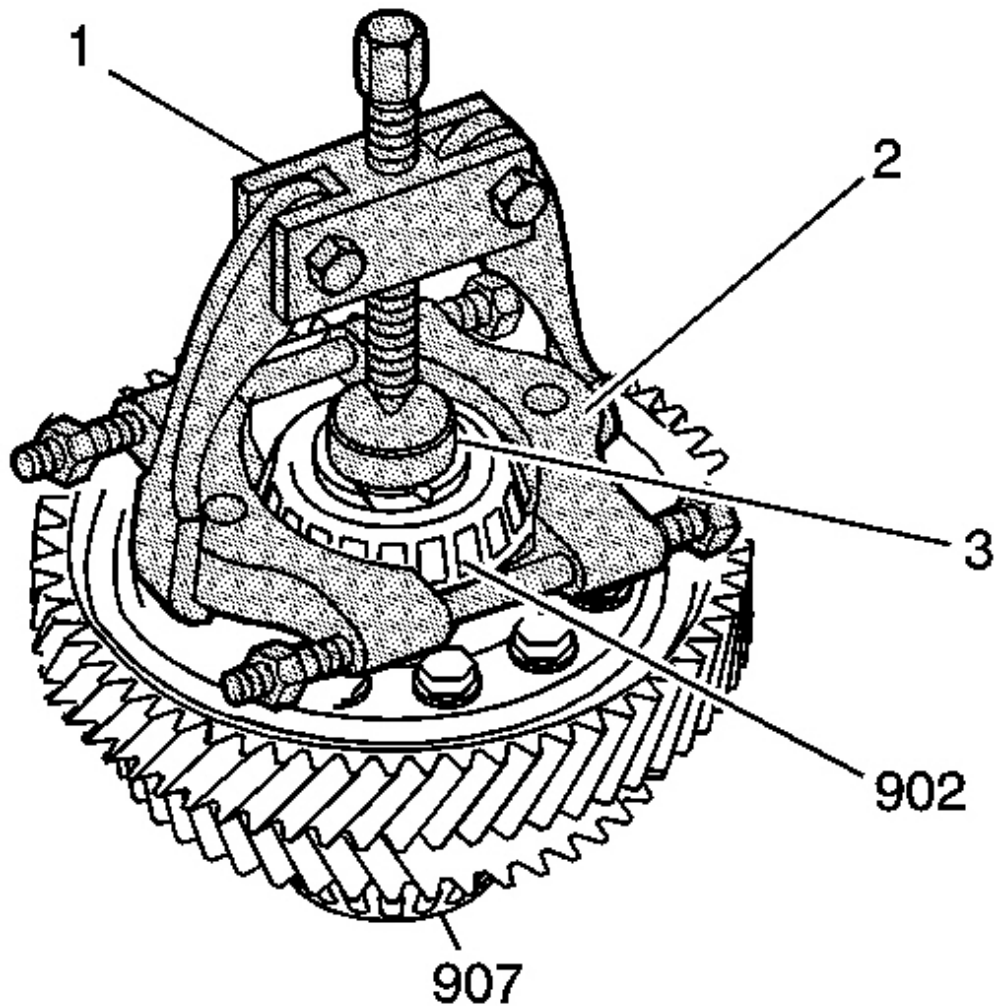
Removing Front Differential Tapered Front/Rear Roller Bearing Using SA9211T-2 & J 22912-01
